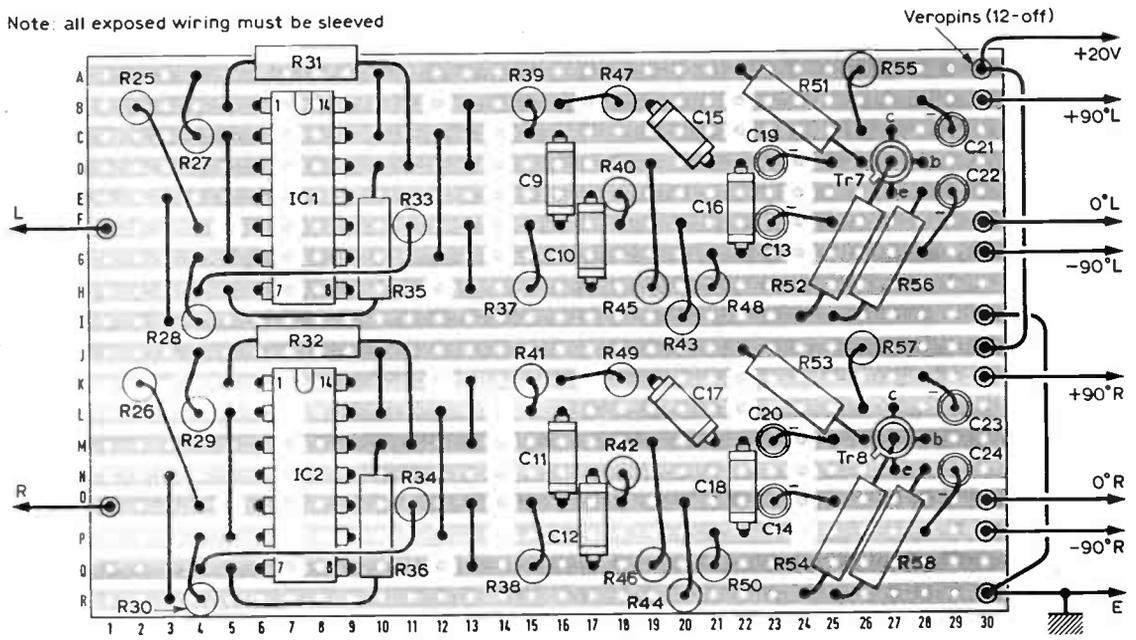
Component layout of unit A circuit board. Note breaks in copper strips.
